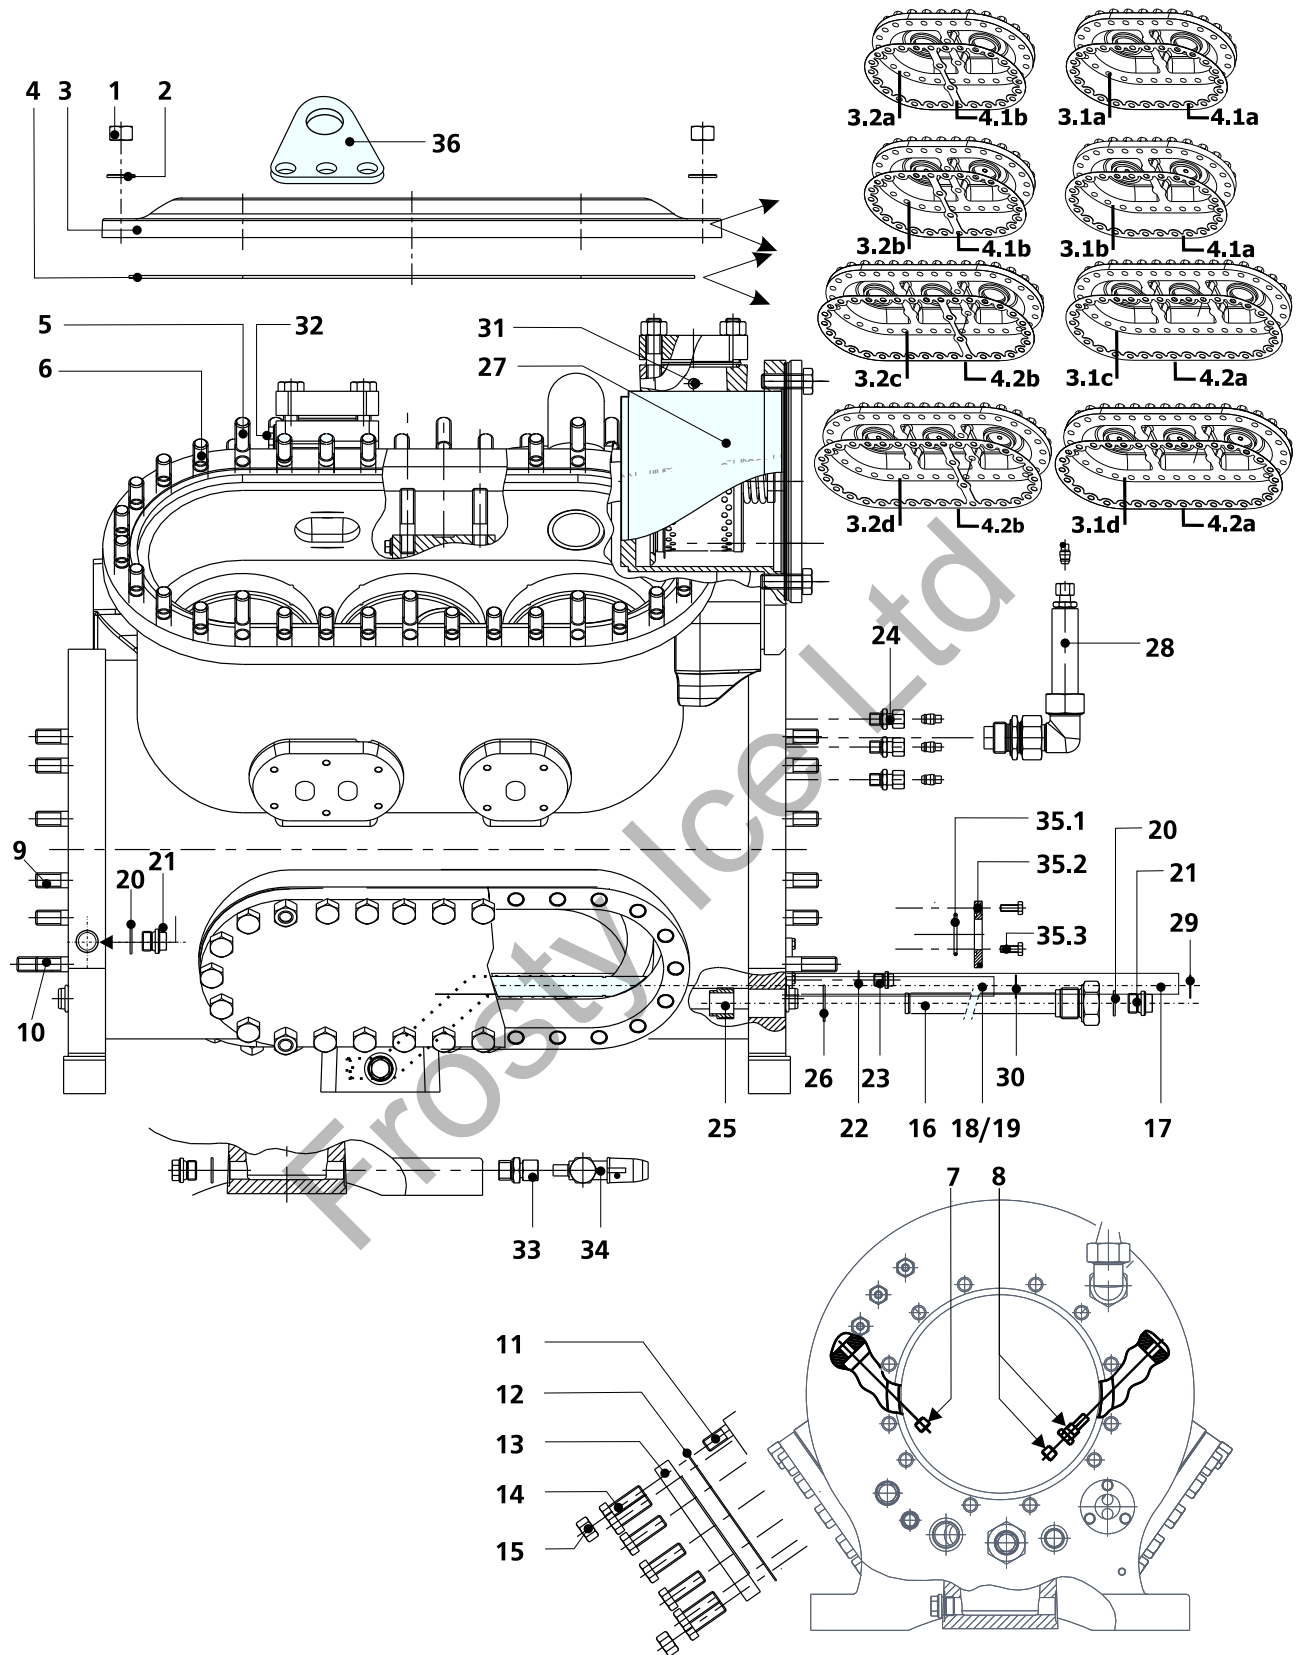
COMPRESSOR HOUSING WITH CONNECTIONS AND MAIN COMPONENTS
